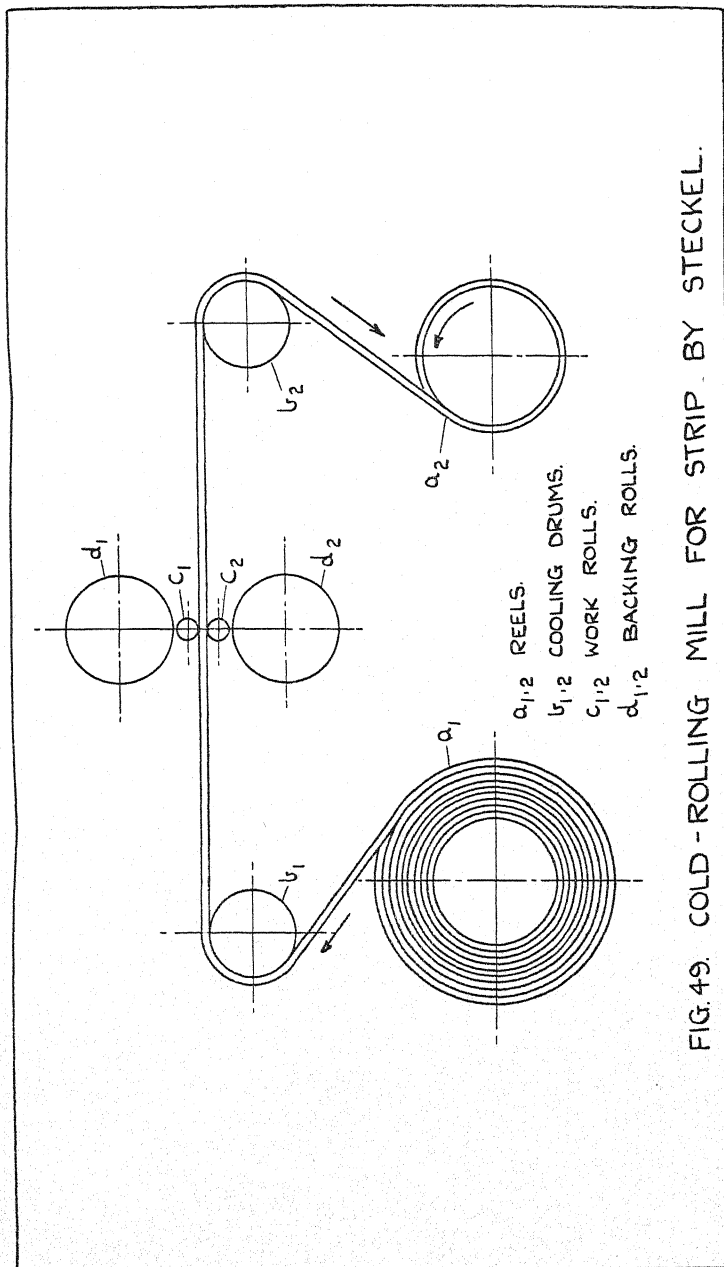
COLD-ROLLING MILL FOR STRIP BY STECKEL.
